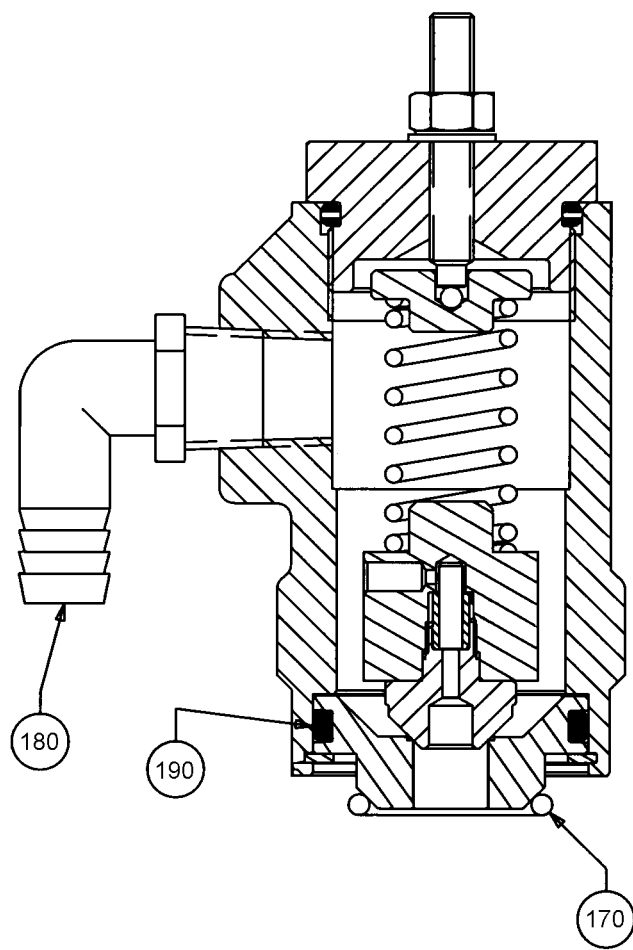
Relief Valve Assembly, Plunger Size 3 1/2" (101-0020-XX0).
